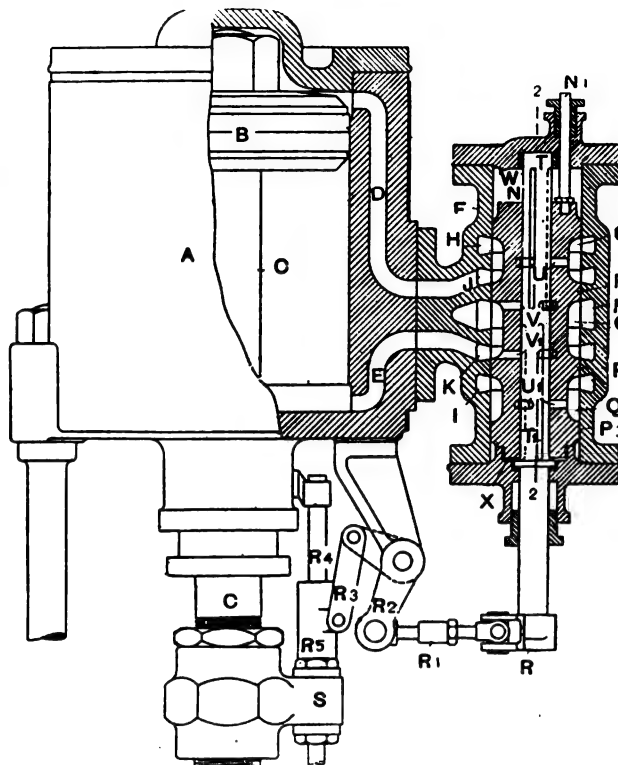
DISTRIBUTING VALVE FOR STEAM ENGINES.—FIG. 11.
